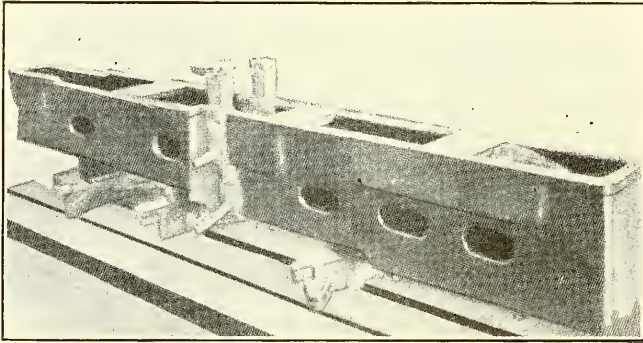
Cast-Iron Rolling Mill Base Repaired for the Waelark Wire Co., Elizabeth, N. J.
